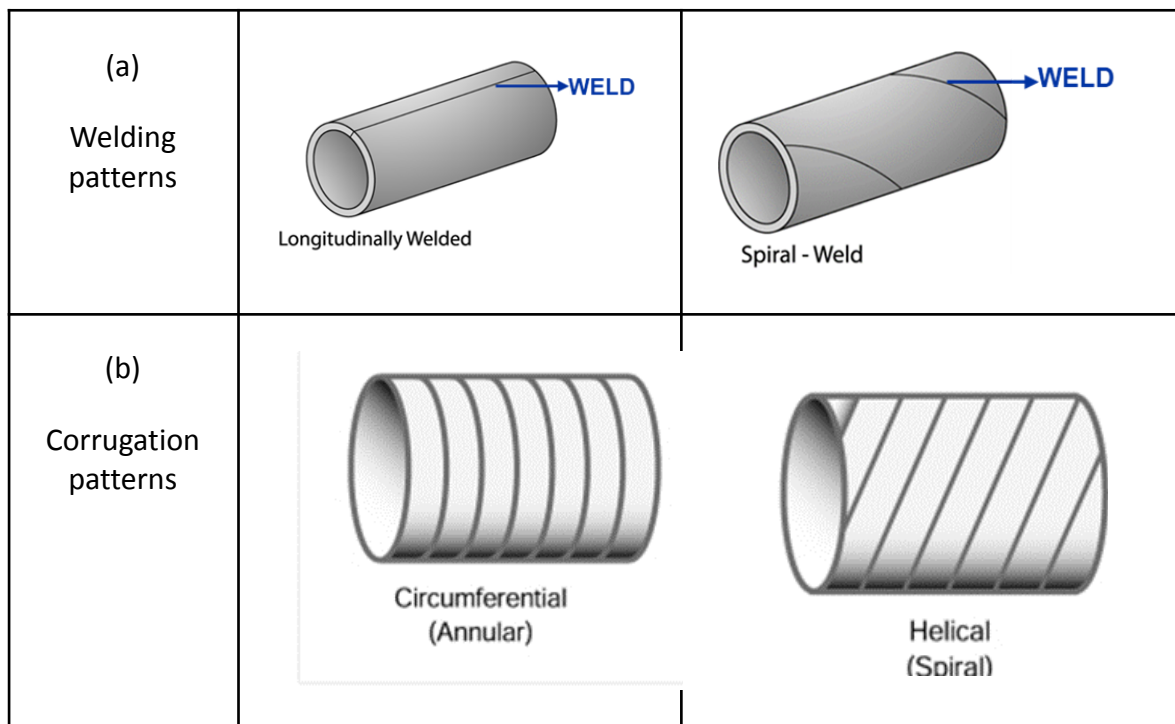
Welding methods for smooth (a) and corrugated (b) tube units
